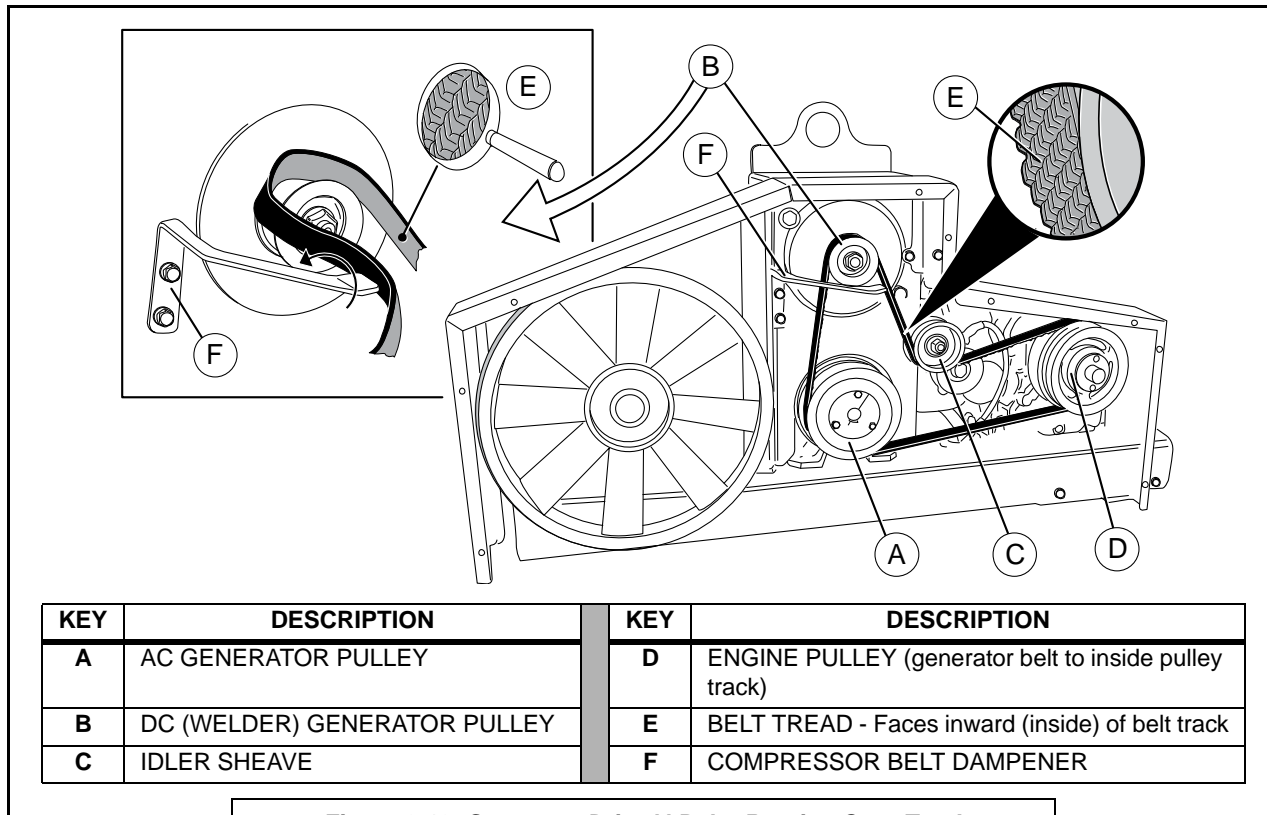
Generator Drive V-Belt - Routing Onto Track
